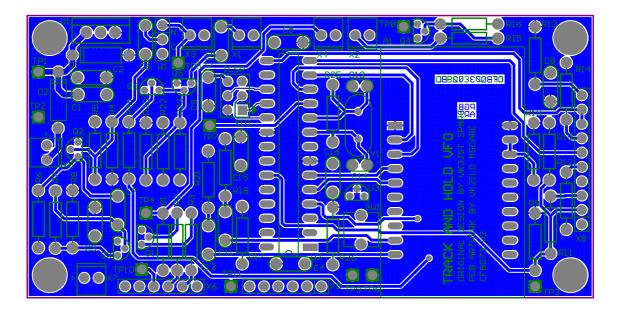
Printed circuit board CFB073 V2 bottom layer (blue) (viewed through board)
